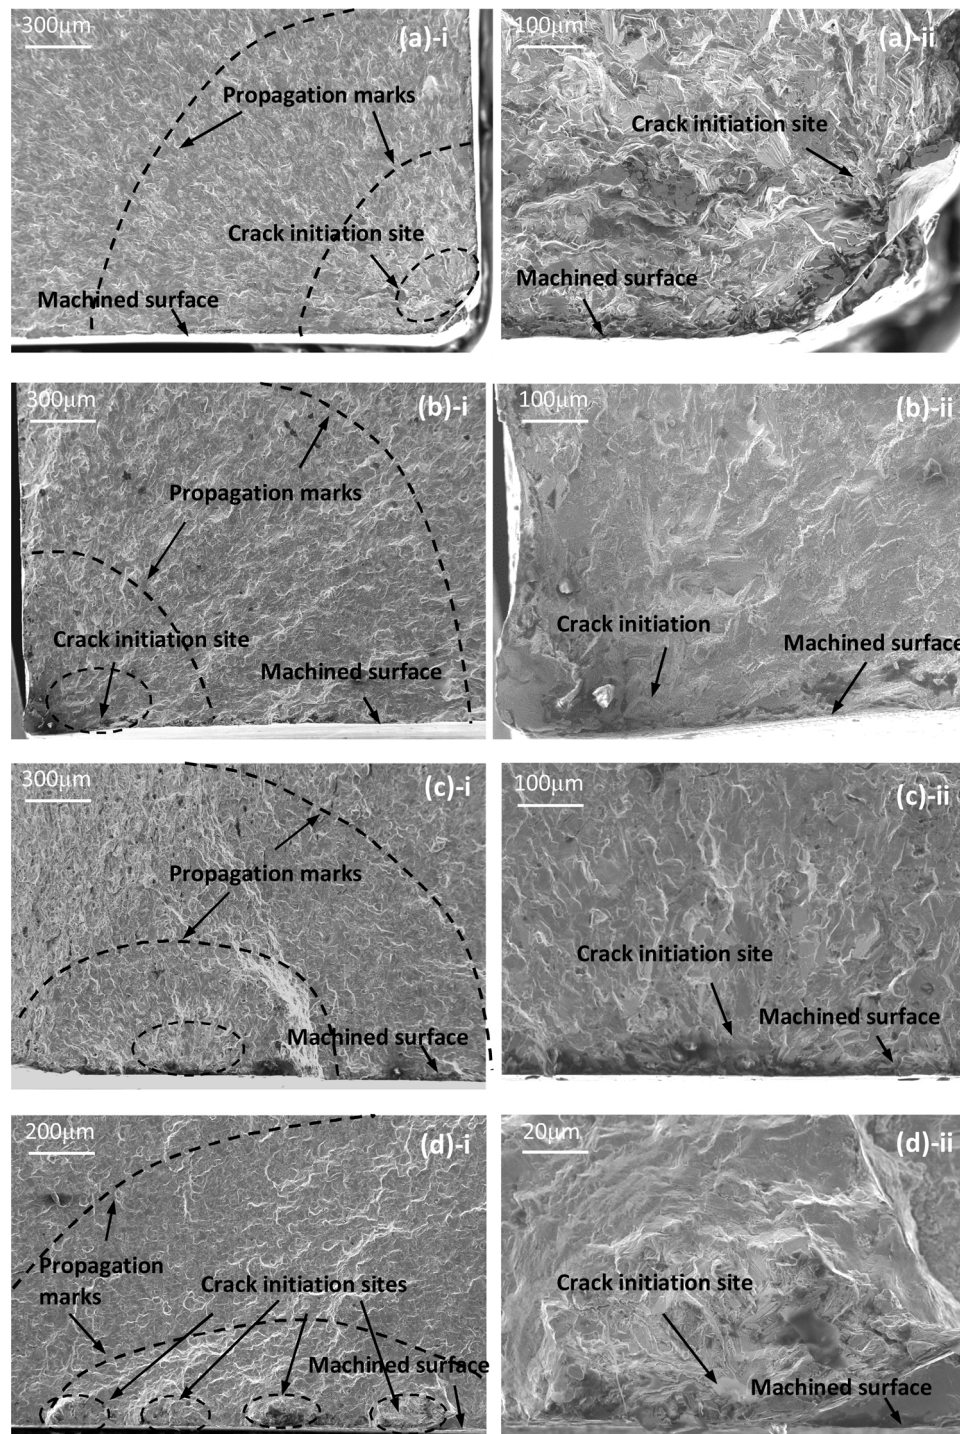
Crack initiation and propagation in the machined surface with different magnifications: (a) conventional finish milling (CFM), (b) conventional rough milling (CRM), (c) laser assisted machining (LAM), (d) abrasive waterjet cutting (AWJ). All images are collected from the fractured samples under 1250 MPa maximum loading stress.
